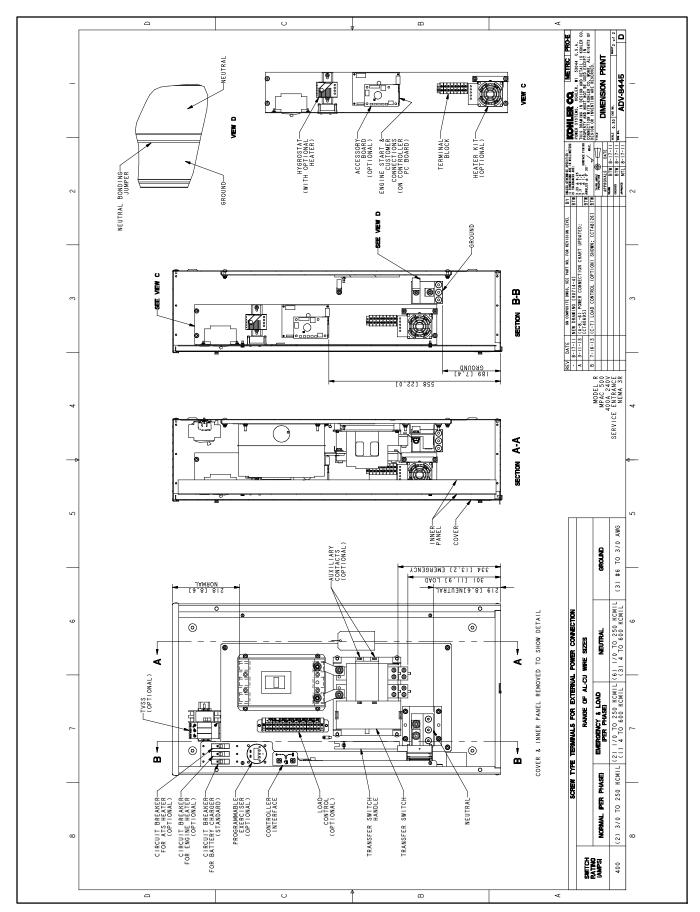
Dimension Drawing, 400 Amp Service Entrance Model, ADV-8445, Sheet 2 of 2
